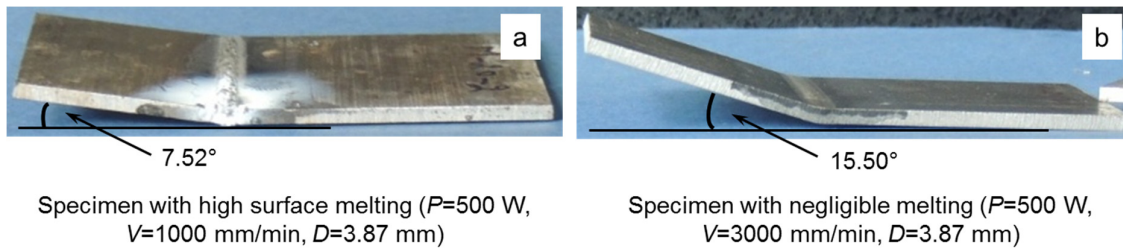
Laser bent specimens with multi-scan laser bending process.
